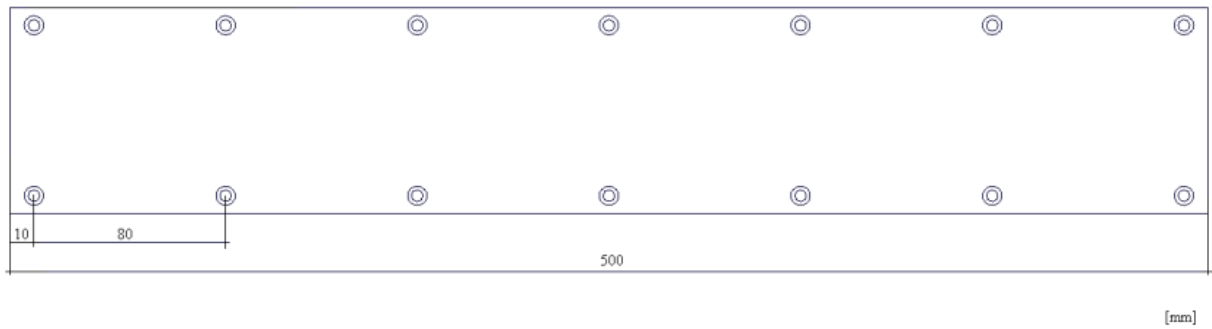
A resistance spot welded beam with 80 mm distance between the spot welds. The adhesive line is not visible in this beam.
